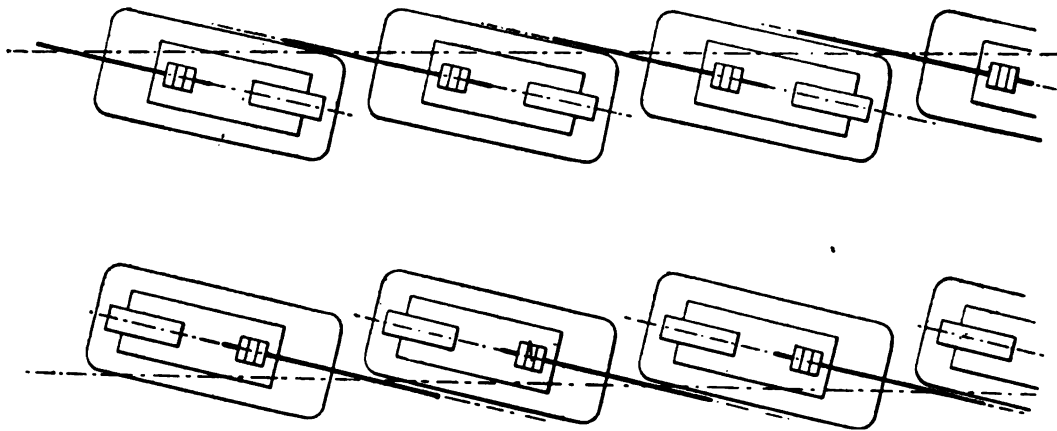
Illustrating the Lay-out of Automatic Screw Machines on a Shop Floor.
